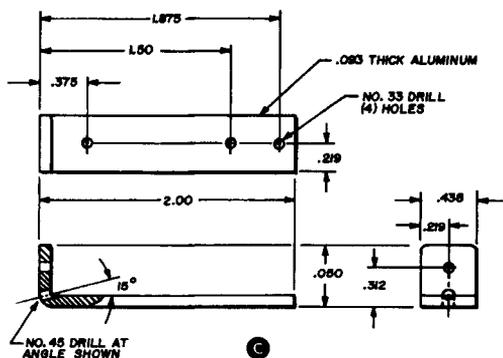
Paddle arm C. The wire spring feeds through the hole drilled on a 15° angle.
